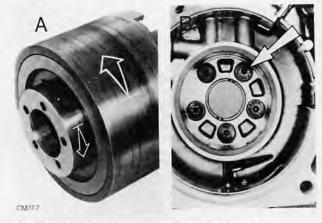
A - Check operation of one-way clutch B - Clutch inner ring recuring bolts
